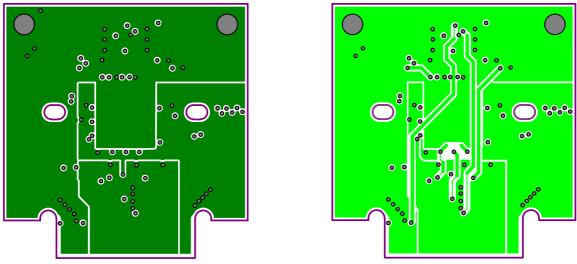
epc660 CC Chip Carrier: Layout middle top and bottom
